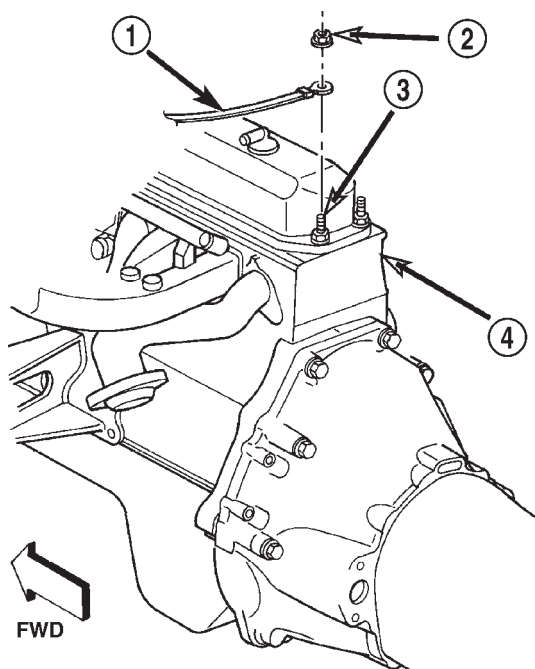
Left Engine-To-Body Ground Strap Remove/Install - 4 Cylinder Engine Only
